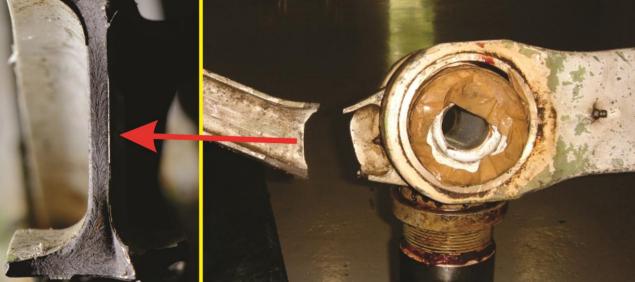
General view of the cylinder interior and a fracture with a 45-degree incline in the interior of the tube (typical fracture due to overload).
